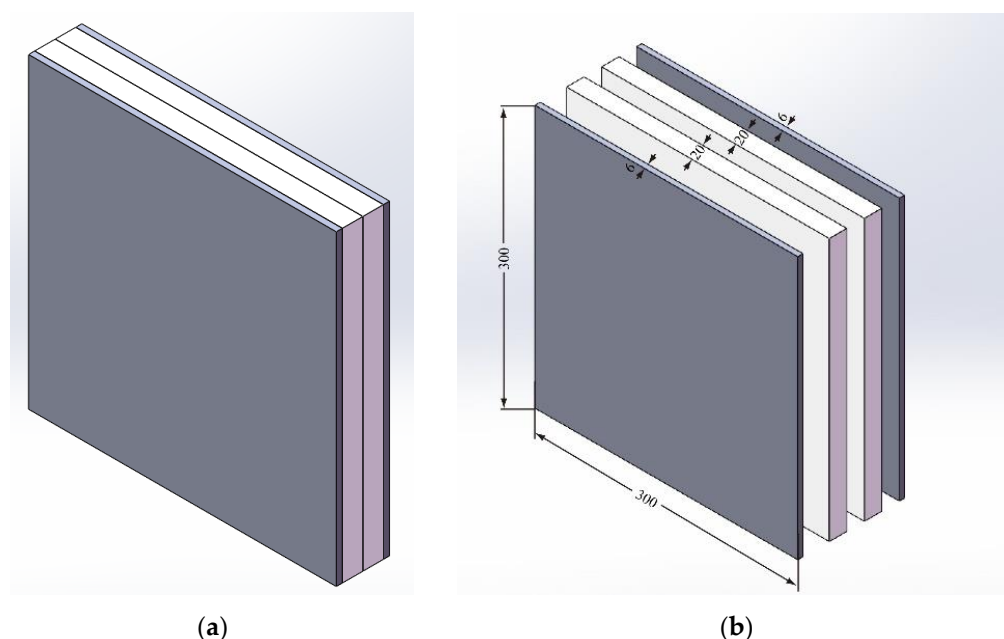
Structures of UHMWPE composite armor. (a) Assembly drawing. (b) Component drawing.
